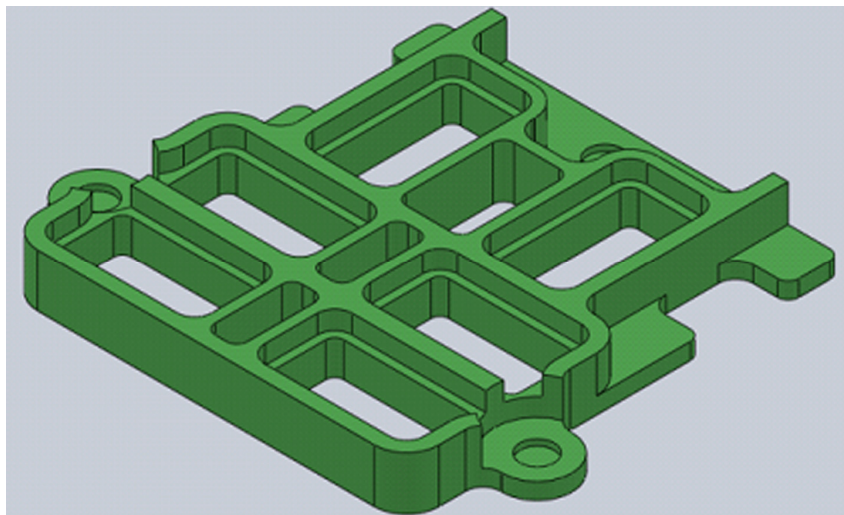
An isometric-view drawing of the frame of the single-part platen.
